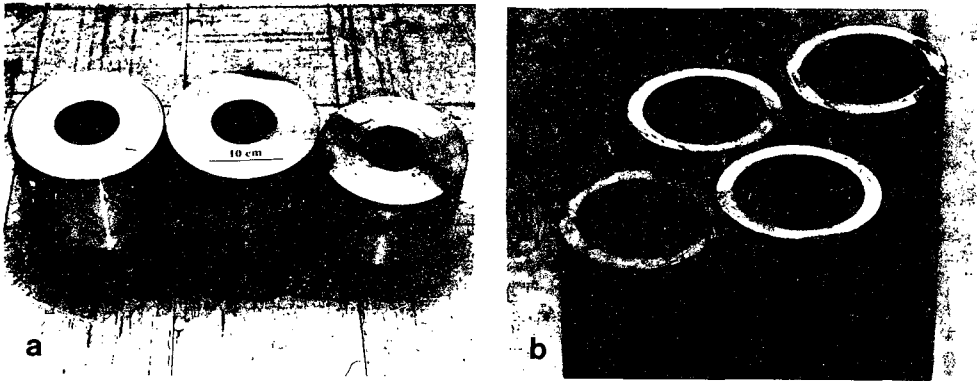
(a) Spray formed billets machined prior to extrusion and (b) extruded tubes
